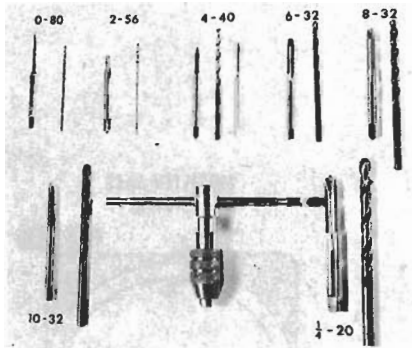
TAPS AND TAP DRILLS. First number indicates size; second, threads-per-inch.
